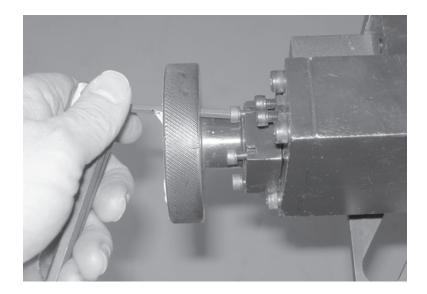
Use a hex wrench to remove the four screws in the end block. Rotate the feed knob to access each screw.
